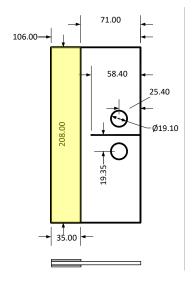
SOCT specimen dimensions, all dimensions in mm.
